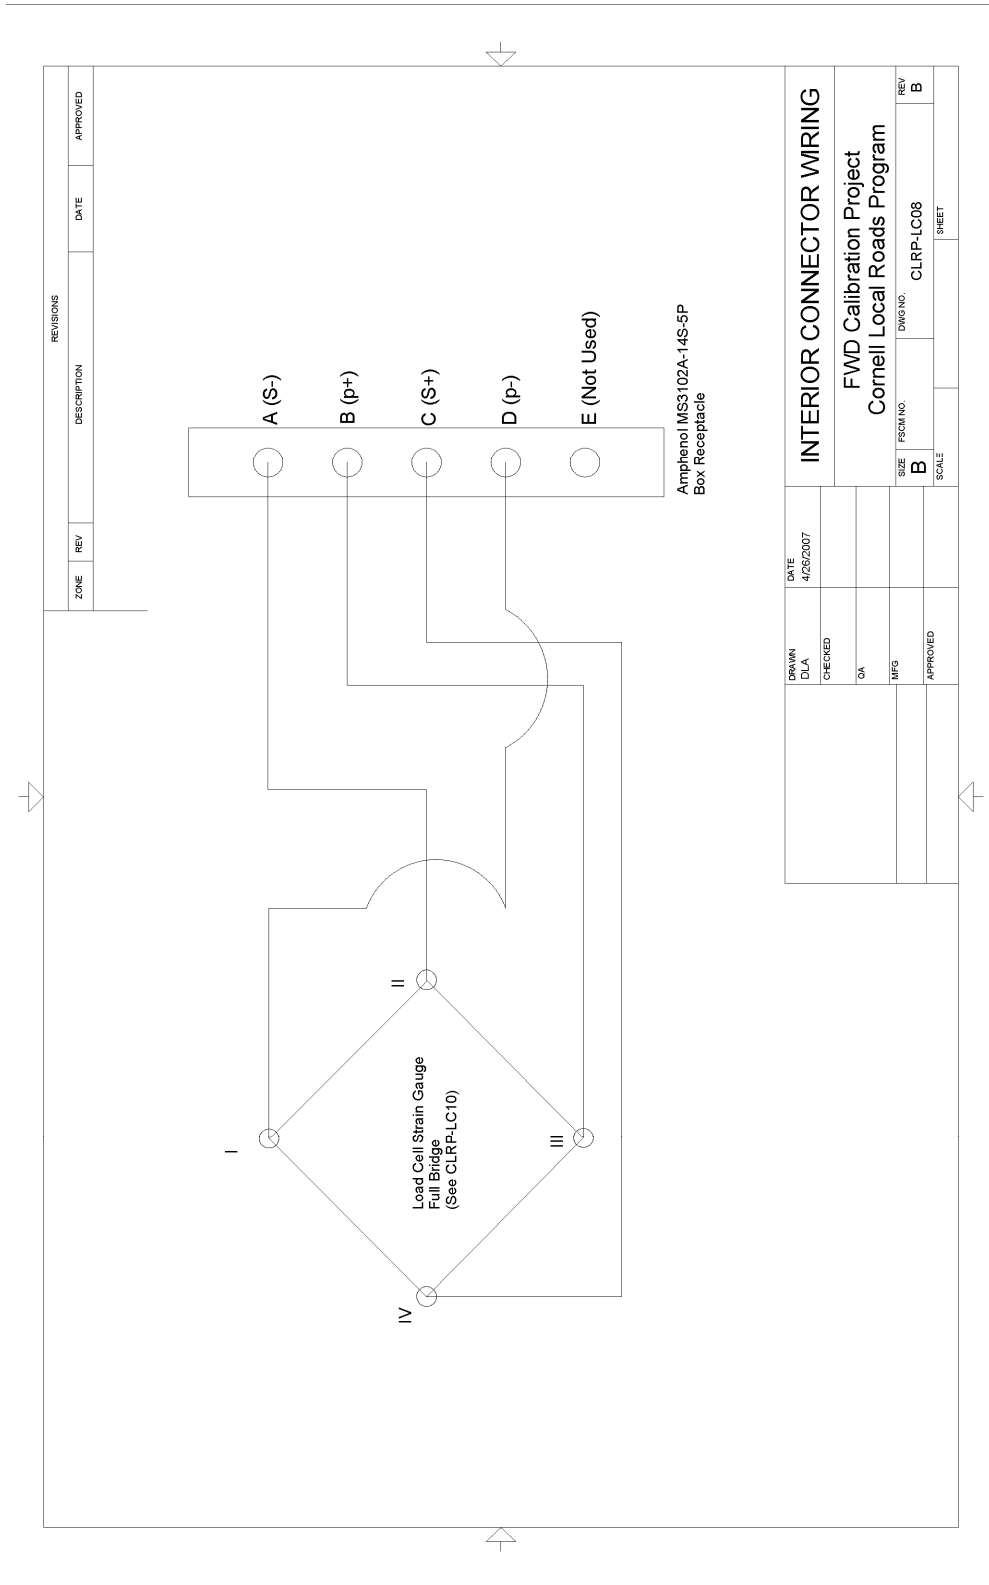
Drawing. CLRPLC08 Interior Connector Wiring.
